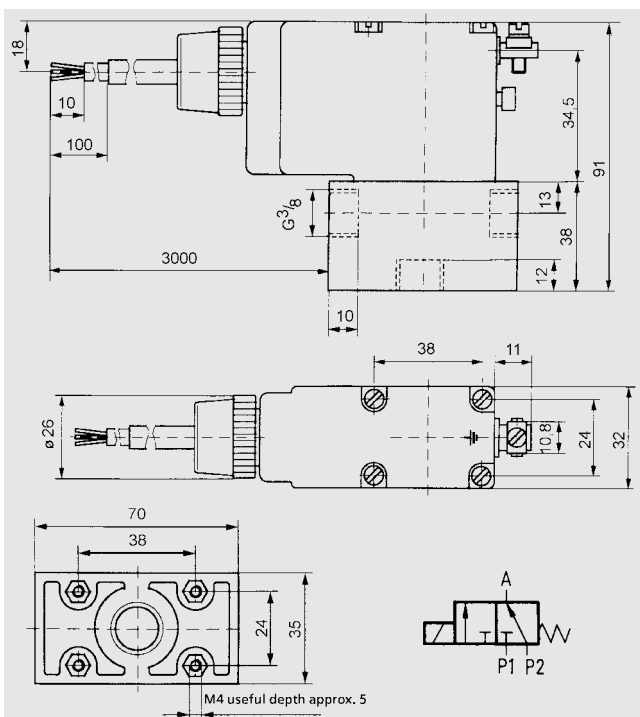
/28 3/2-way solenoid valve made of PTFE, explosion-proof
